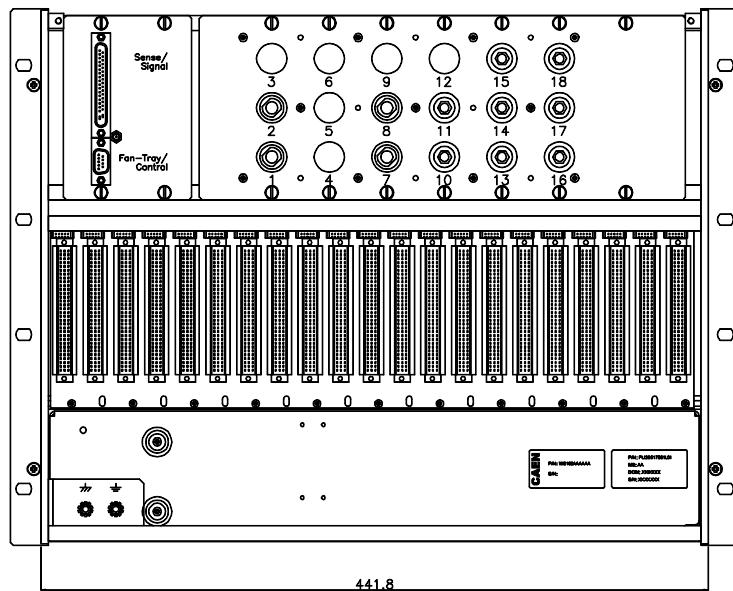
Mod. VME8100 Rear view (Power Supply removed)
